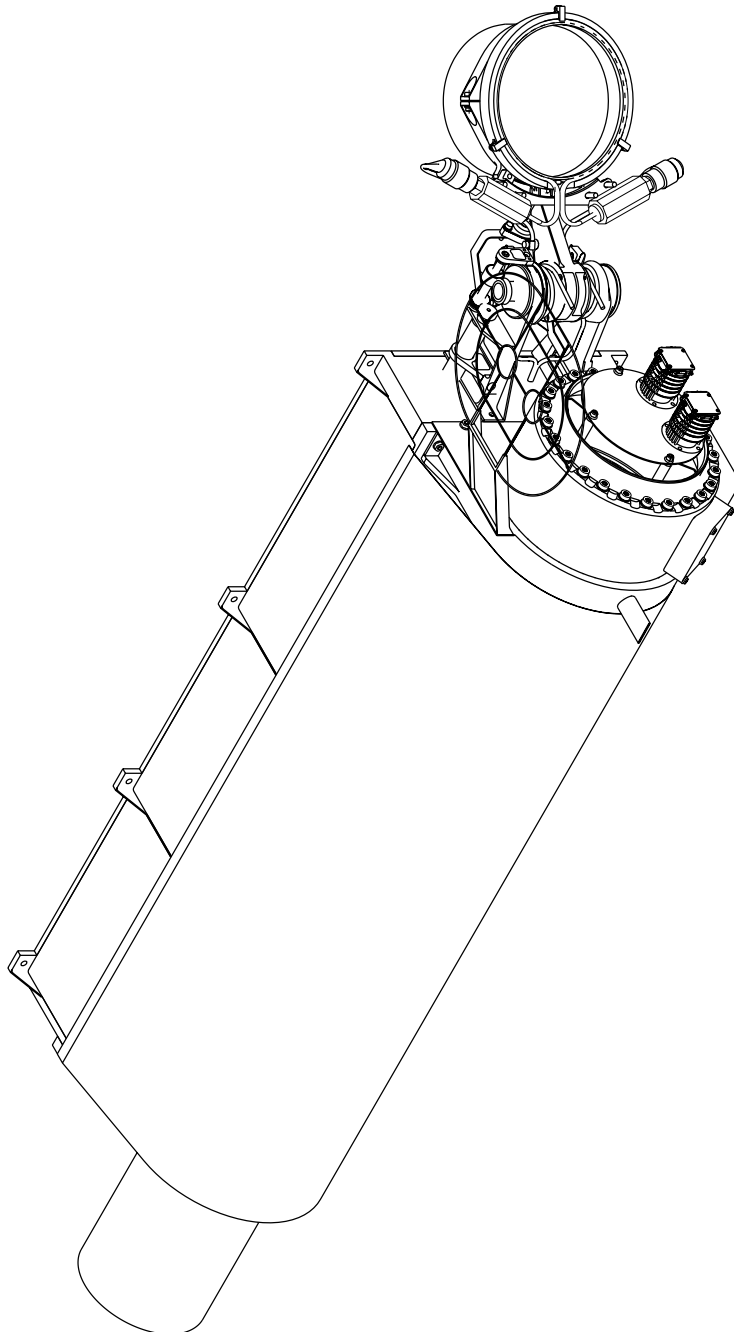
Mechanical Interface Control Drawing of RTOF in Launch Configuration (UoB Drawing M156-1002)
